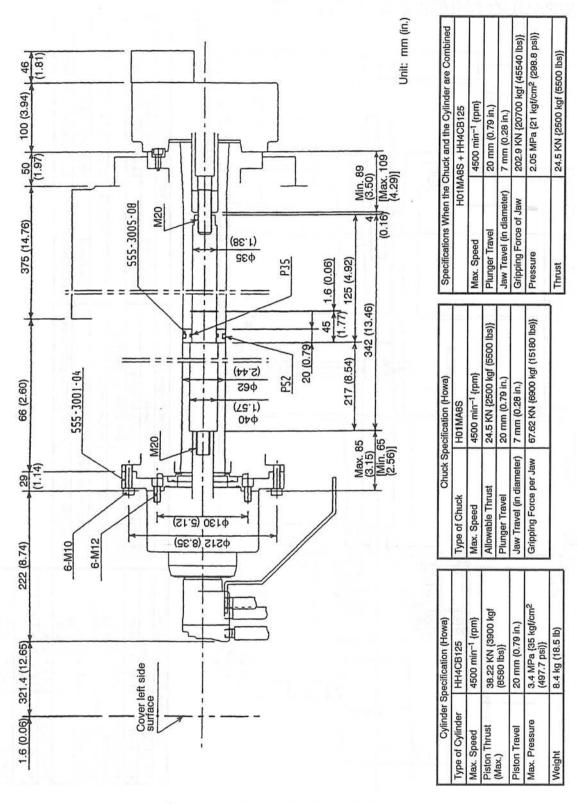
Hydraulic Chuck and Cylinder (2)
